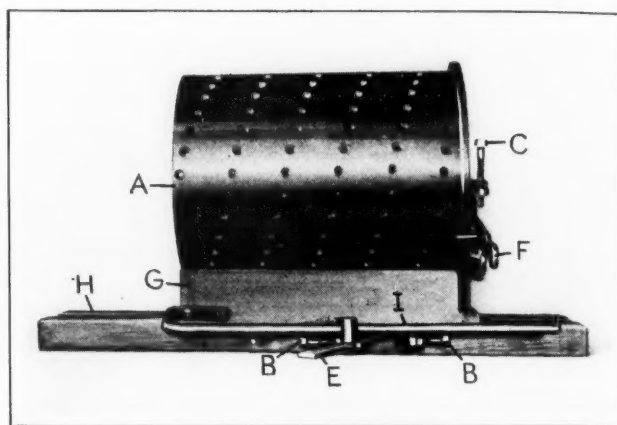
Locomotive Axle Bushing Mounted on Indexing Jig Used in Drilling Lubricating Holes
